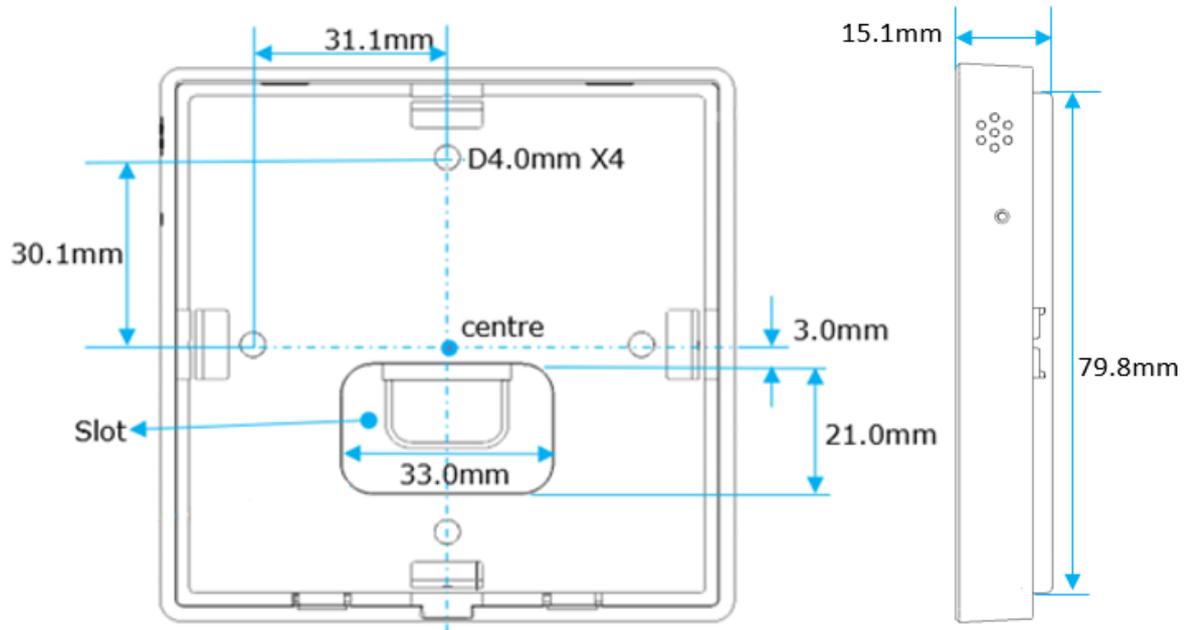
CTP40 Device Rear Cover’s Slots and Screw Holes Drawings (Back View / Side View)
